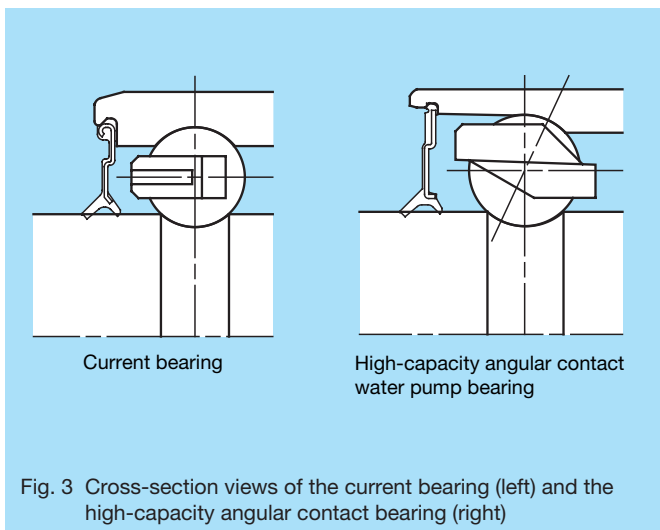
Cross-section views of the current bearing (left) and the high-capacity angular contact bearing (right)
